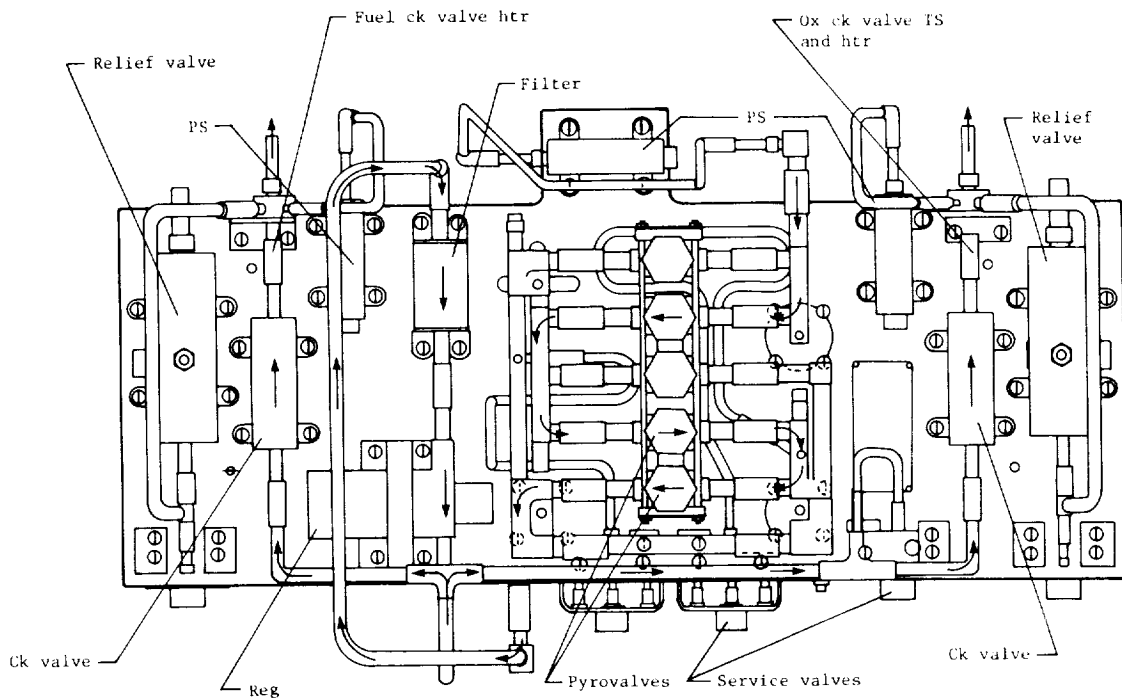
Flight temperature sensor and heater location for pressurant control assembly.
